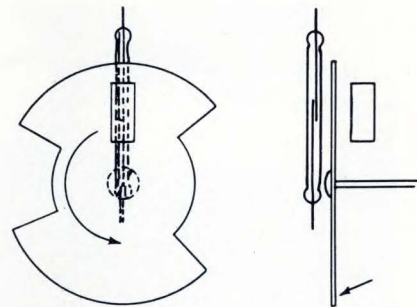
Magnet and switch are stationary. Disk-type cam with cutouts rotates. Switch is actuated whenever cutout permits magnet flux to reach switch.
